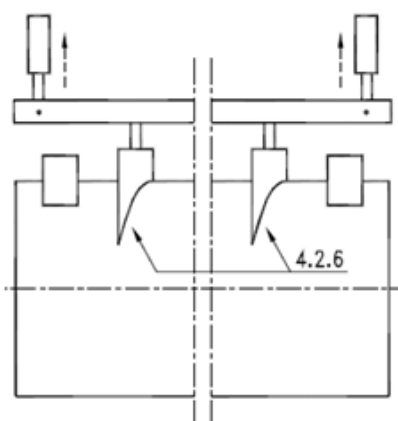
Location of mechanical hazards on a two-roll mill with retractable ploughs
